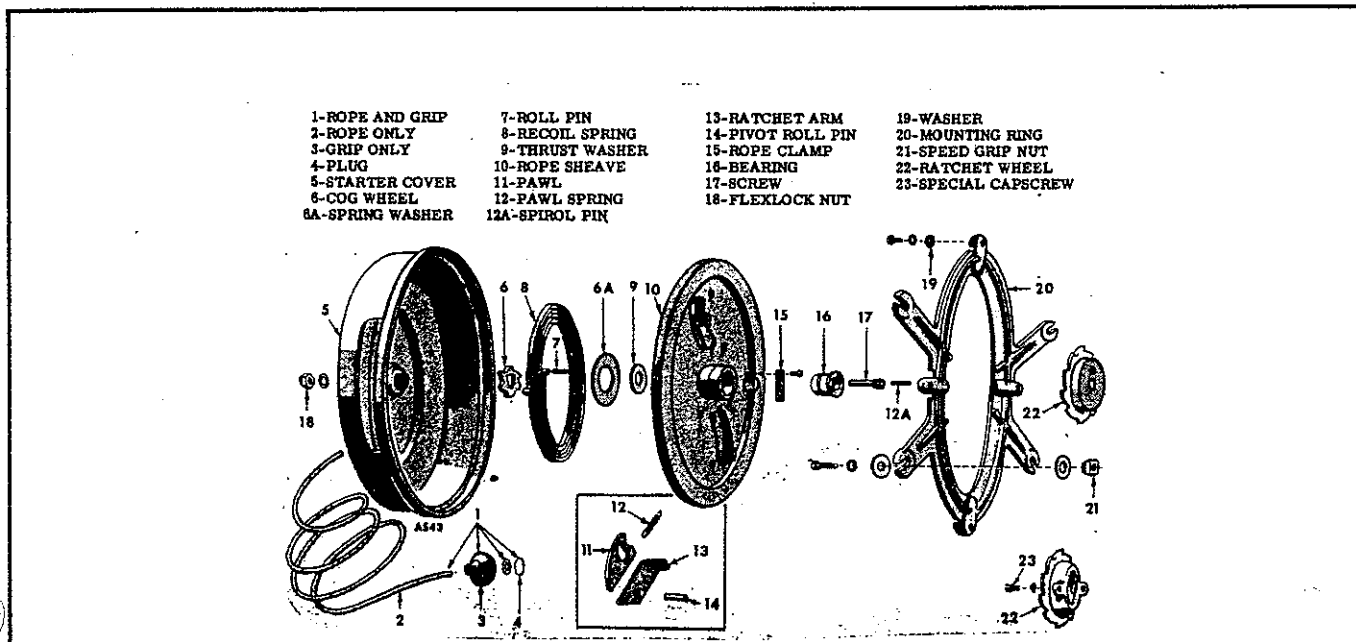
READI-PULL STARTER DISASSEMBLY
